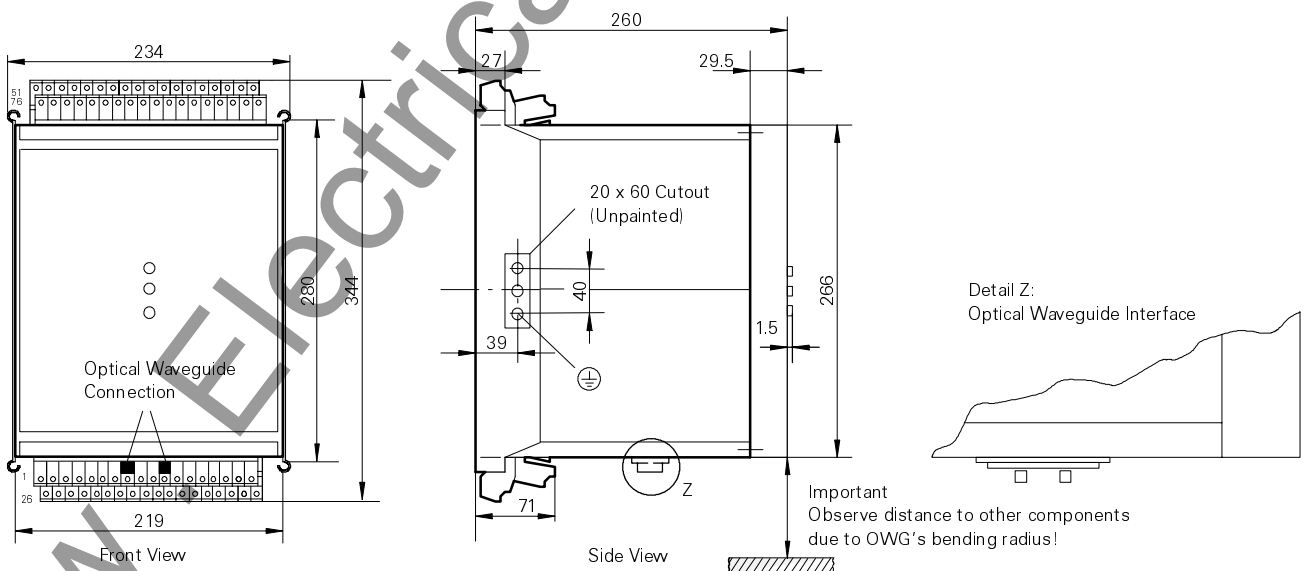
Dimensional Drawing of 7XP2040-1 for Panel Surface Mounting, Device Version 7SA519 (all dimensions in mm)
